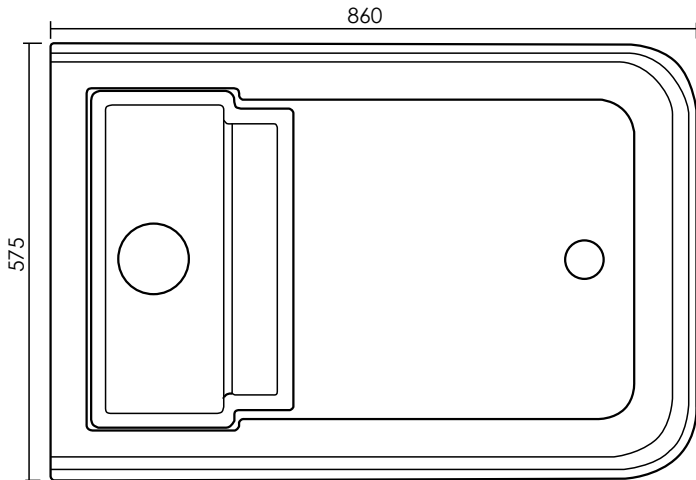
Cetus Sieve Dimensions (Overhead View)
